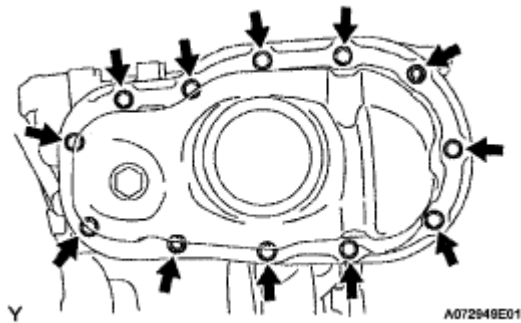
Identifying Seal Packing Of Oil Pan
